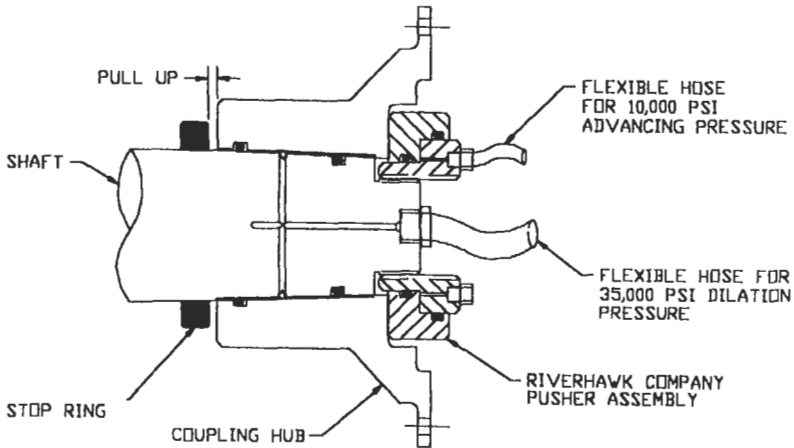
Hydraulic mounting fixture for tapered-bore coupling hubs.
